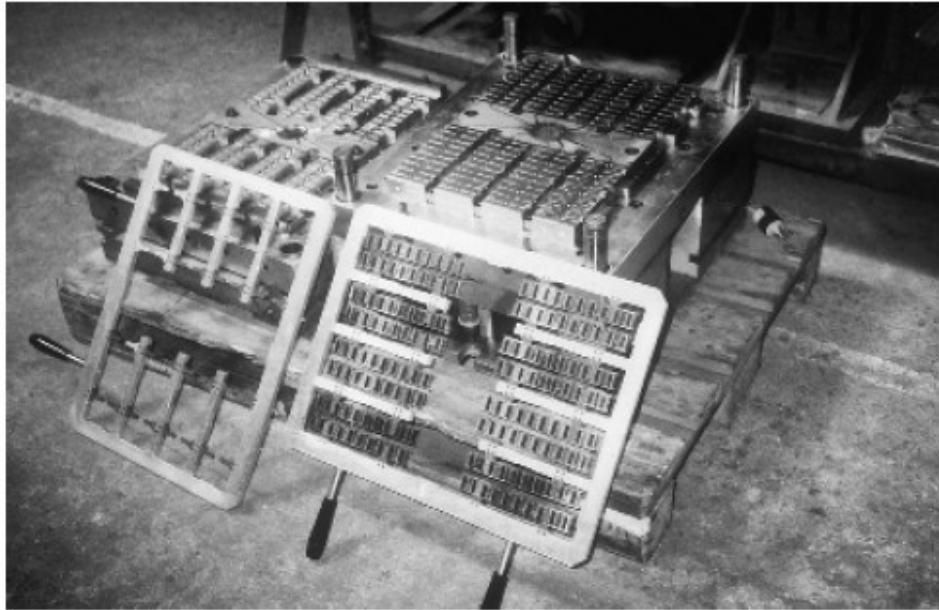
Production transfer mold, with work loading fixtures, for encapsulating 160 dual in-line integrated circuits per cycle, producing about 40,000 devices per shift with one press and operator.
